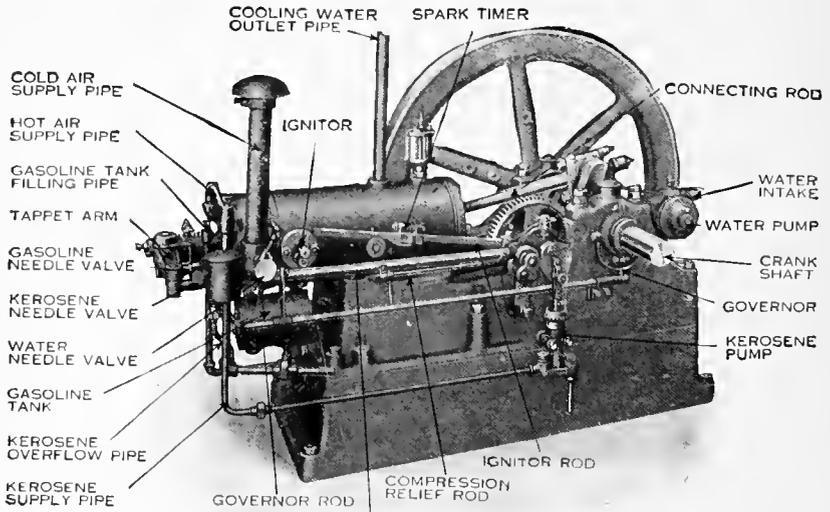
Side view of Horizontal Oil Engine (Flywheel removed).
